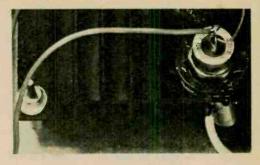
Closeup photo shows how triac is mounted on heat sink with insulating mica washer. Note nylon washer under the heat sink's mounting nut.
